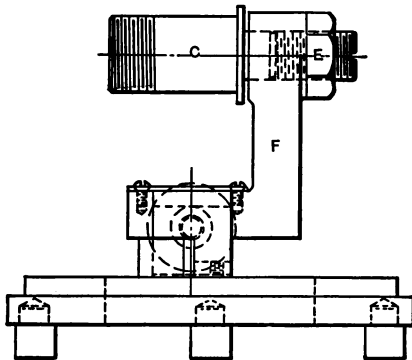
Side View of Formed Fluting Cutter Grinding Device
